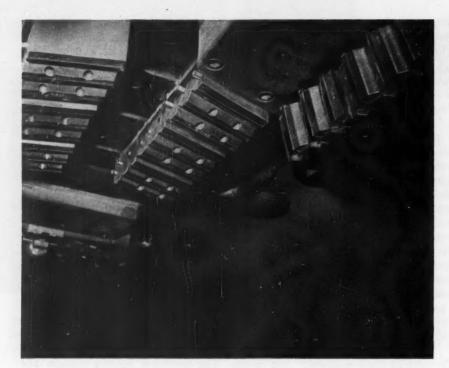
Solid-carbide finishing blades and carbide-tipped roughing bits mounted in the machine seen in Fig. 2 for broaching cylinder blocks
